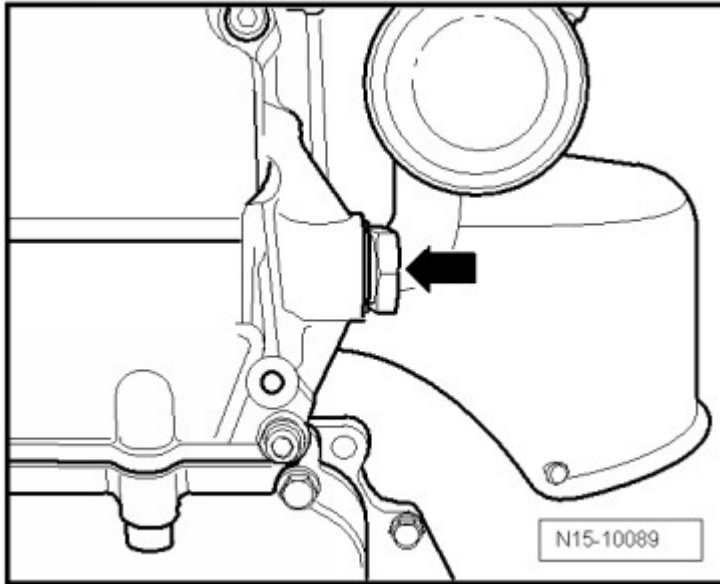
Identifying Chain Tensioner For Camshaft Roller Chain
